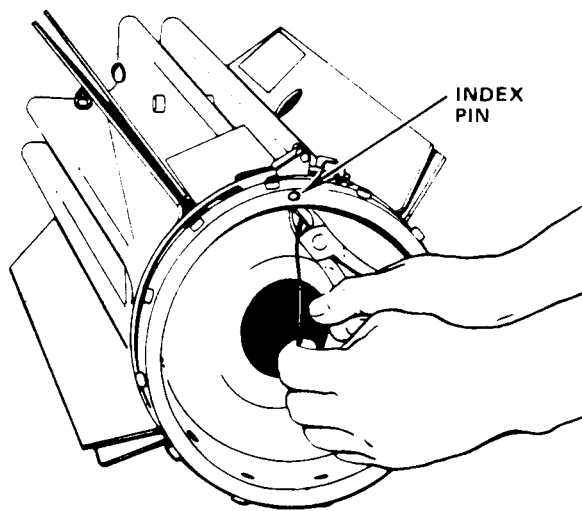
Internal Arming Wire Cut Flush with Flange
